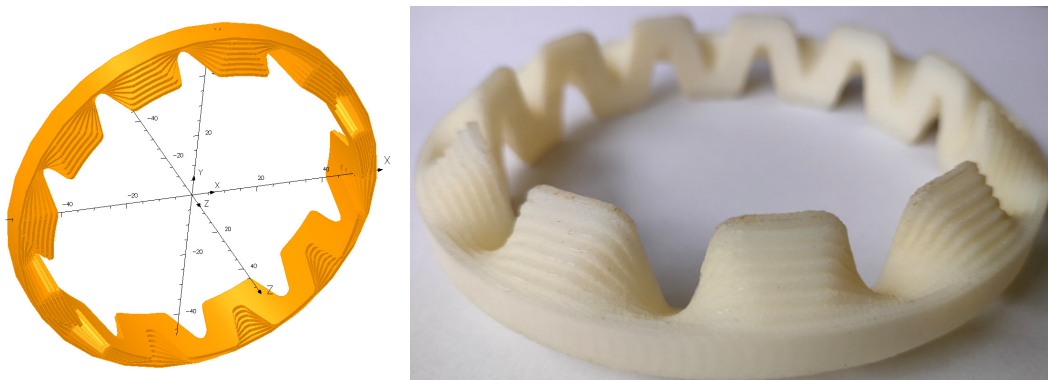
Winding design (left) and dummy 3D-printed winding (right).
